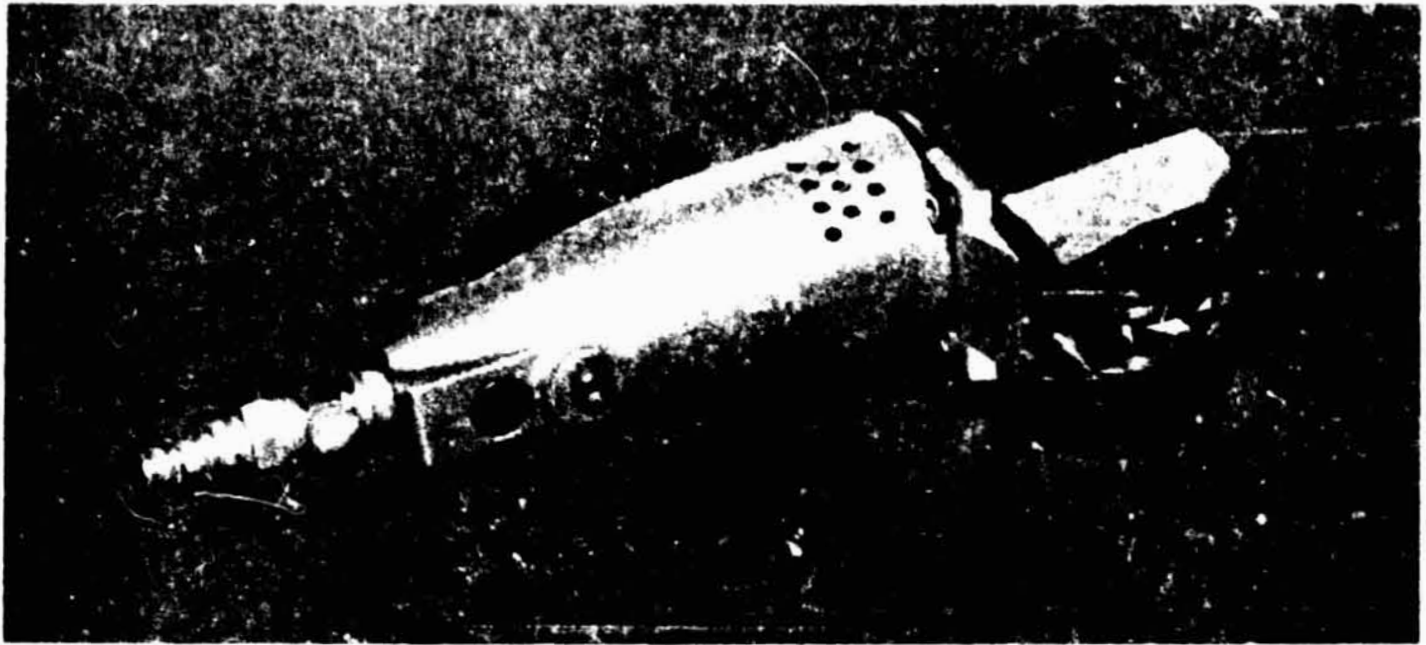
Tool Used for Weld-Groove Configurations
